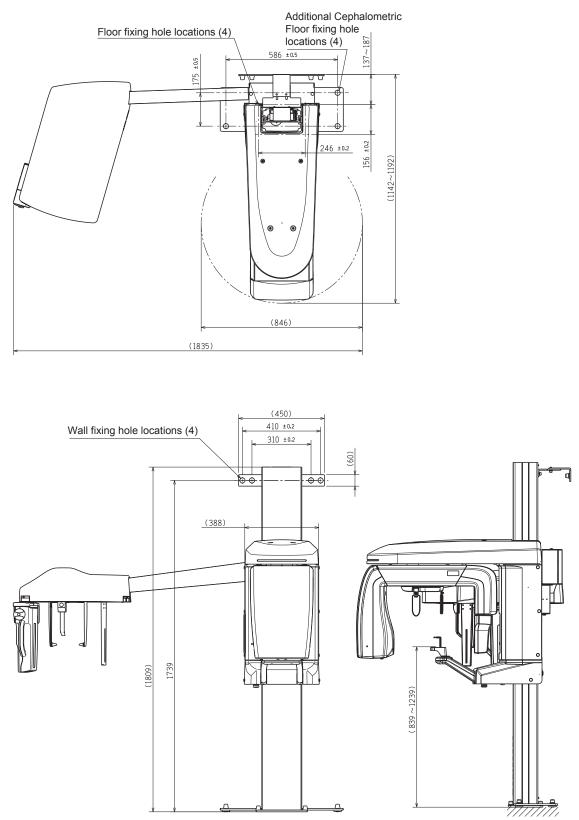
Fixing hole location measurements (Standing position wall-mount short type: 3D Cephalometric type)
